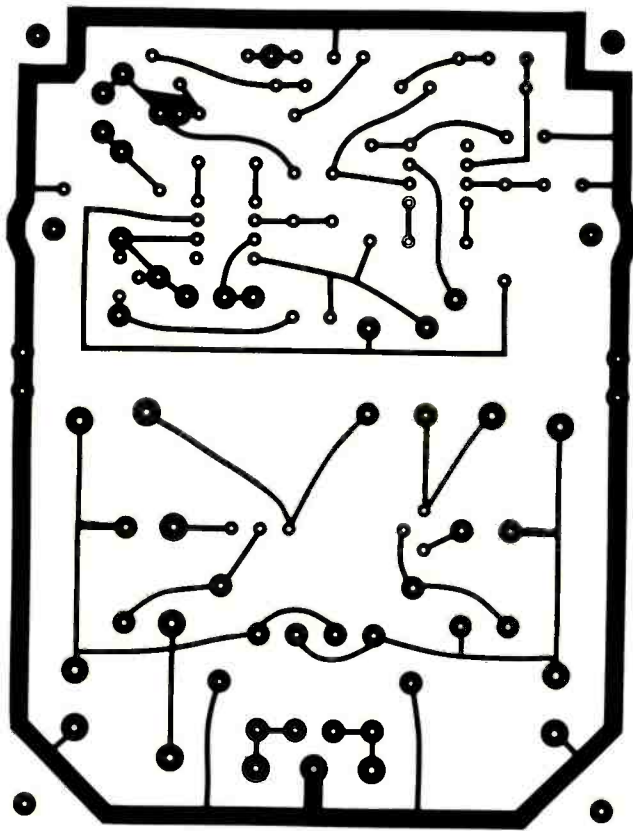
Actual size etching and drilling guide for pc board for the ohms and ac converter is shown at left, components placement above. Board can be separate from power supply if desired.
